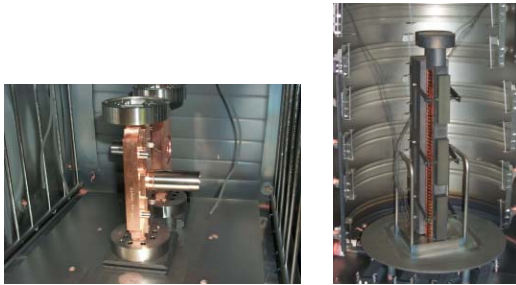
Coupler sub-assembly in the small furnace and disk stack assembly in the large furnace
